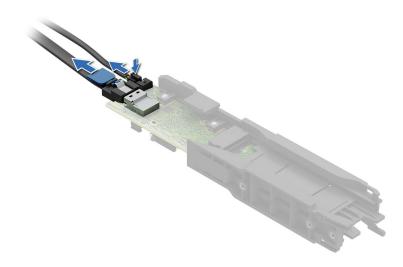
Removing the BOSS-N1 power cable and Signal cable
